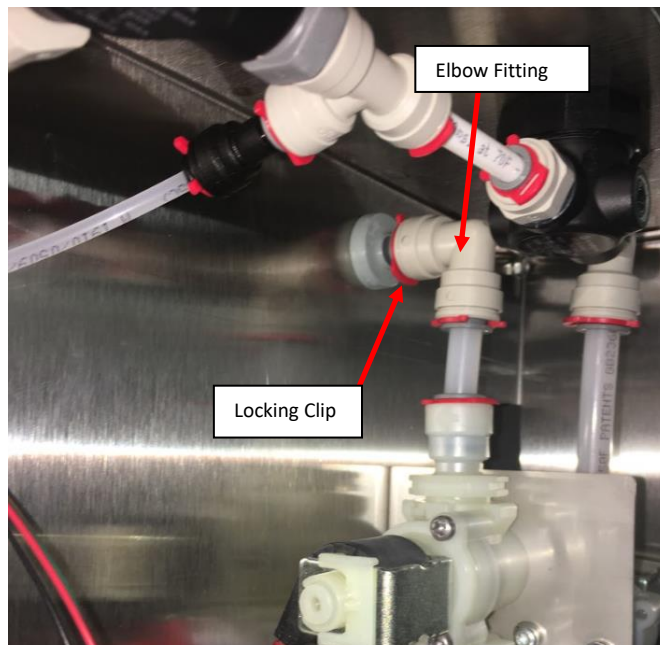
Elbow on Solenoid/Flowmeter Assembly inserted into Barrier Tube on the Right of Enclosure with Locking Clip installed.
